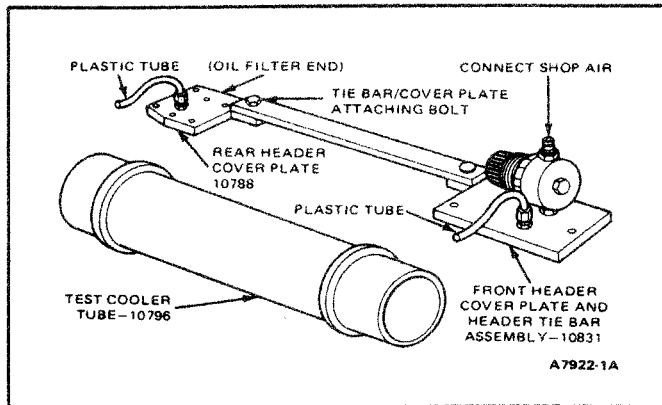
Oil Cooler Internal Leakage Test Equipment
